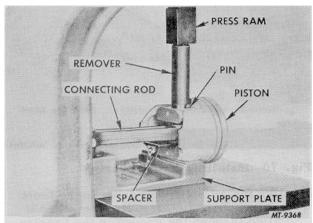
Inserting Spacer SE-1946-3 and Piston Pin Remover SE-1946-1 for Pin Removal
